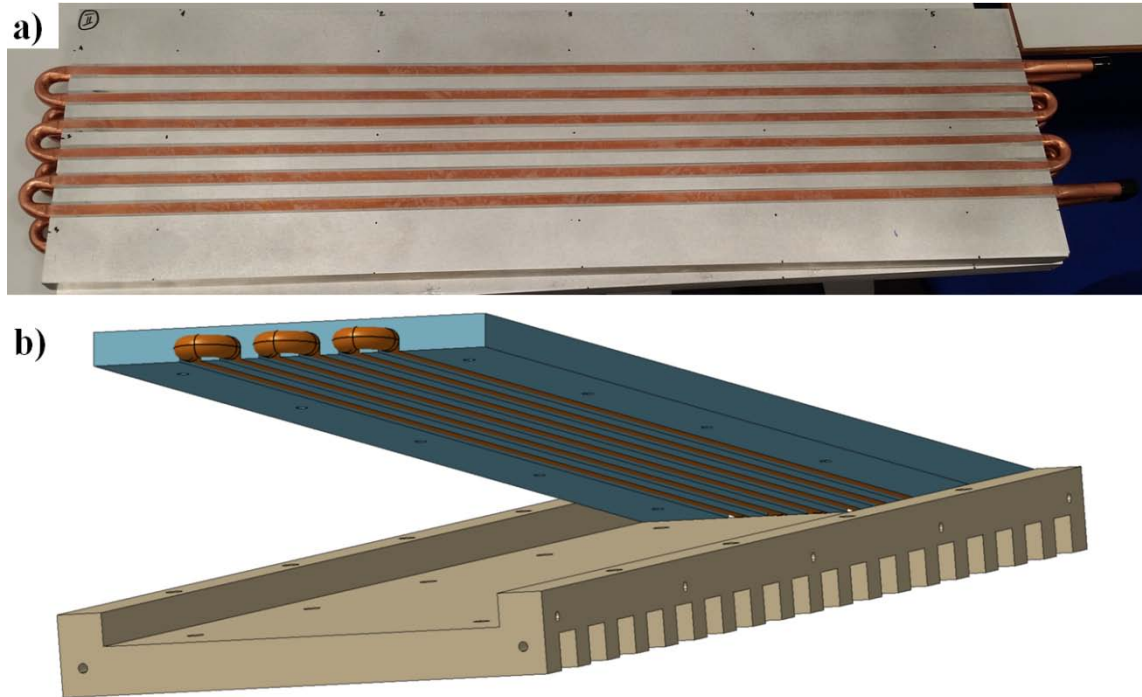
a) Cold plate; b) Exploded view of cold plate and LVR board guide connection
